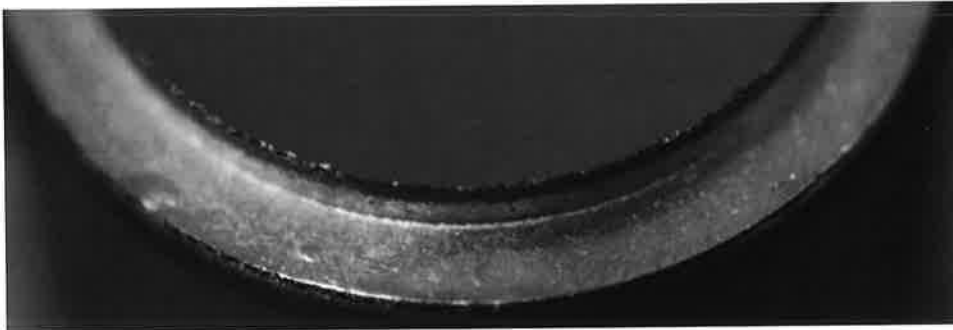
Close-up view of a soldered thin-disk structure, showing the heat sink, thin solder layer, and some residual overspray of the Ti:Pt:Au layers on the edge.
